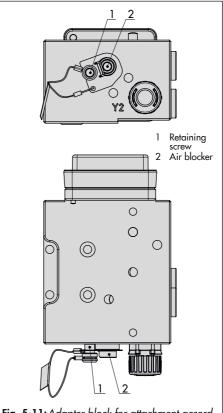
Adapter block for attachment according to VDI/VDE 3847-2
